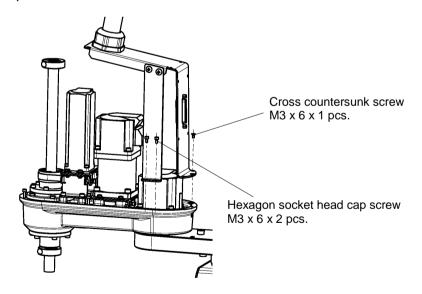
Dismounting harness guide and support plate (KHL-300, KHL-400)
